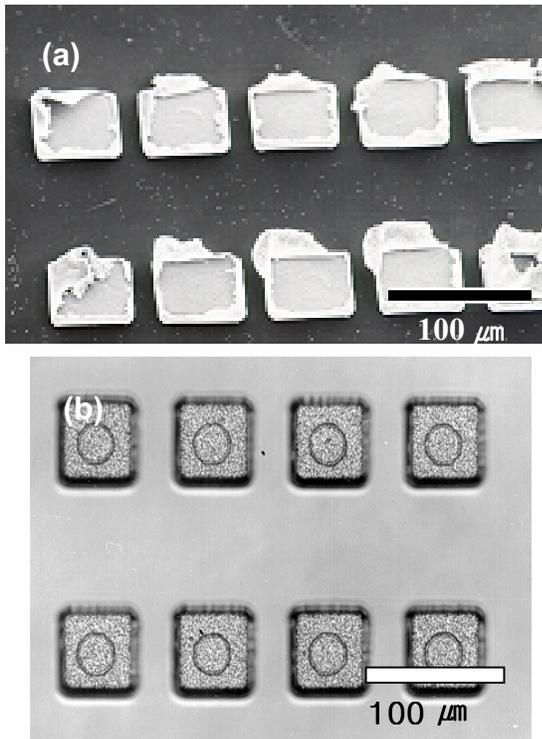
SEM images of as-deposited solder bumps formed using (a) conventional solder mask and (b) overhang-shaped solder mask.
